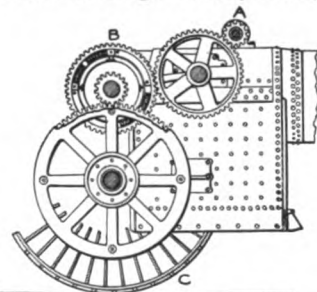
Driving gear for traction engine. A, main driving pinion; B, differential gear, showing spiral springs to relieve shocks on rough roads; C, main drive wheel.
